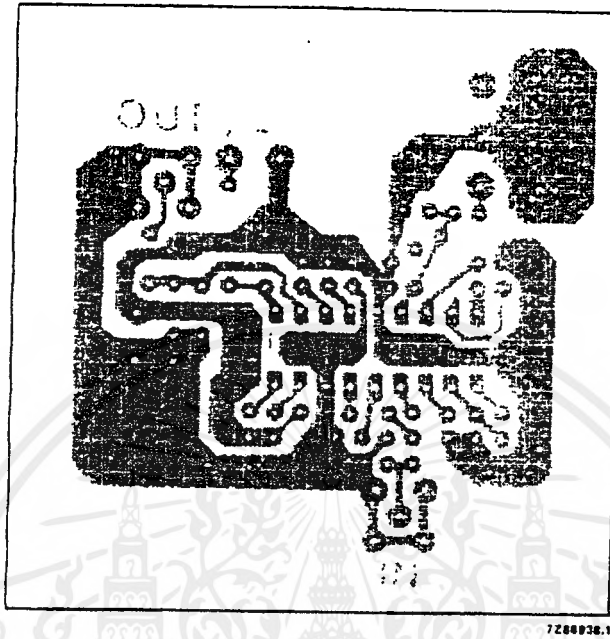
Track side of printed-circuit board used for the circuit of Fig.4.
